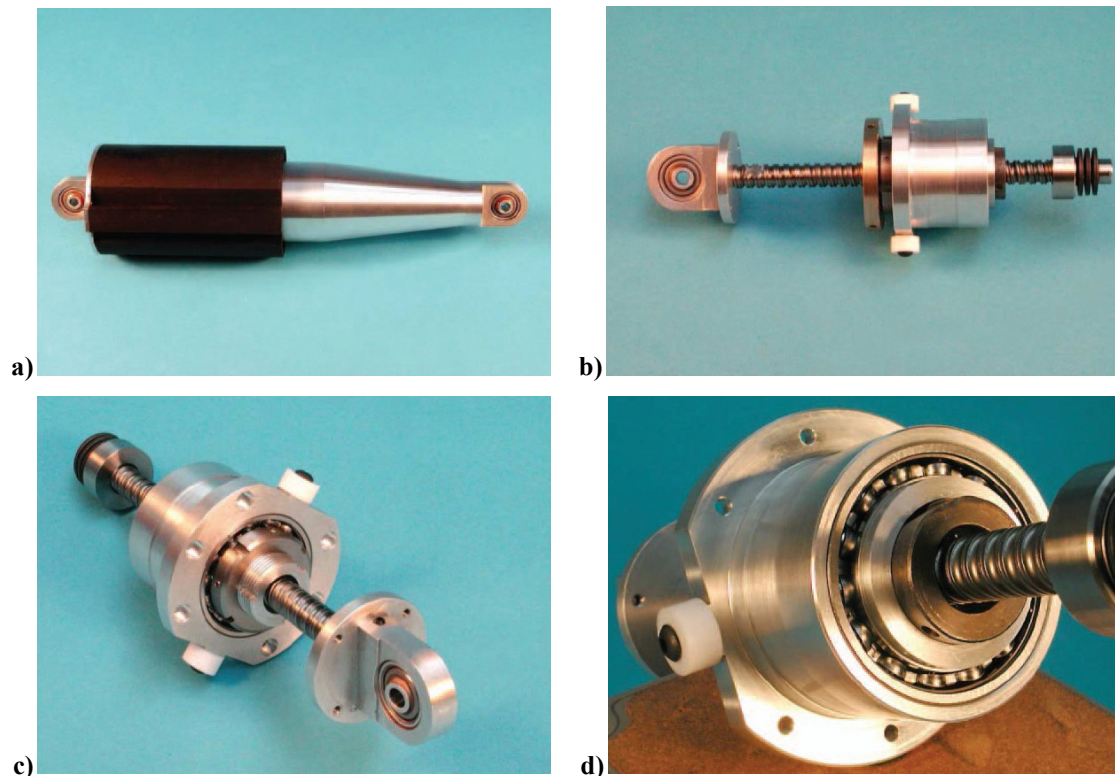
Ball-screw inerter made at Cambridge University Engineering Department; mass ≈ 1 kg, adjustable inertance ≈ 60 – 240 kg [3]: a) complete inerter with outer case, b) ball-screw, nut and flywheel, c) flywheel removed, d) thrust bearing
